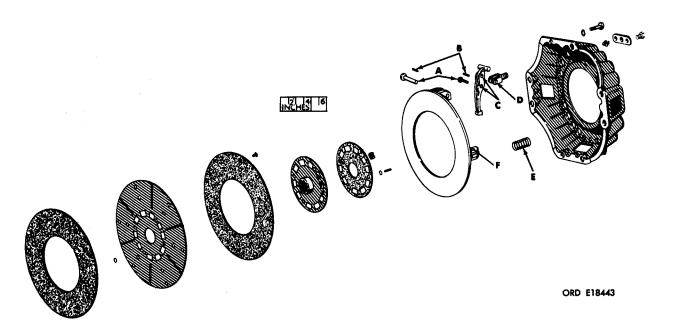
REPAIR AND REBUILD STANDARD POINTS OF MEASUREMENT FOR CLUTCH ASSEMBLY.
